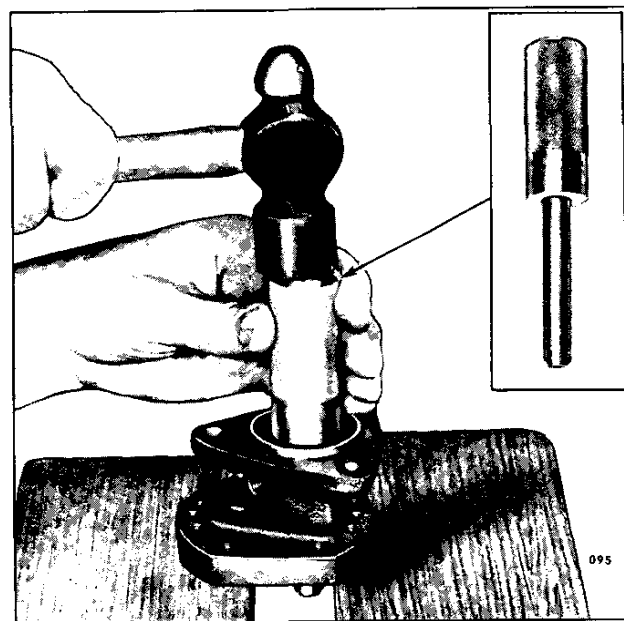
Installing Inner Oil Seal Using Tool J 1508-8
